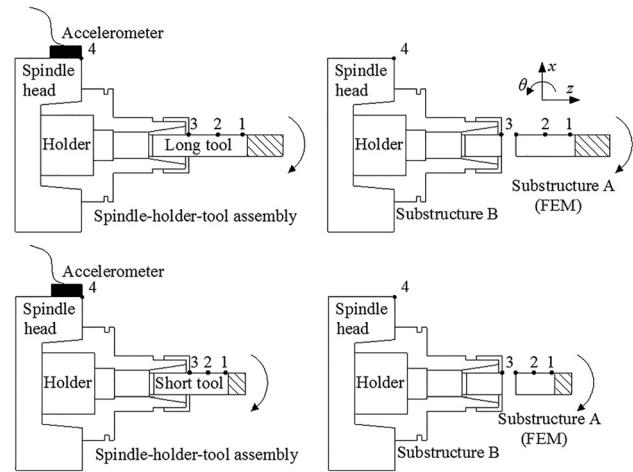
Two tools of different lengths clamped in spindle-holder assembly and substructures
